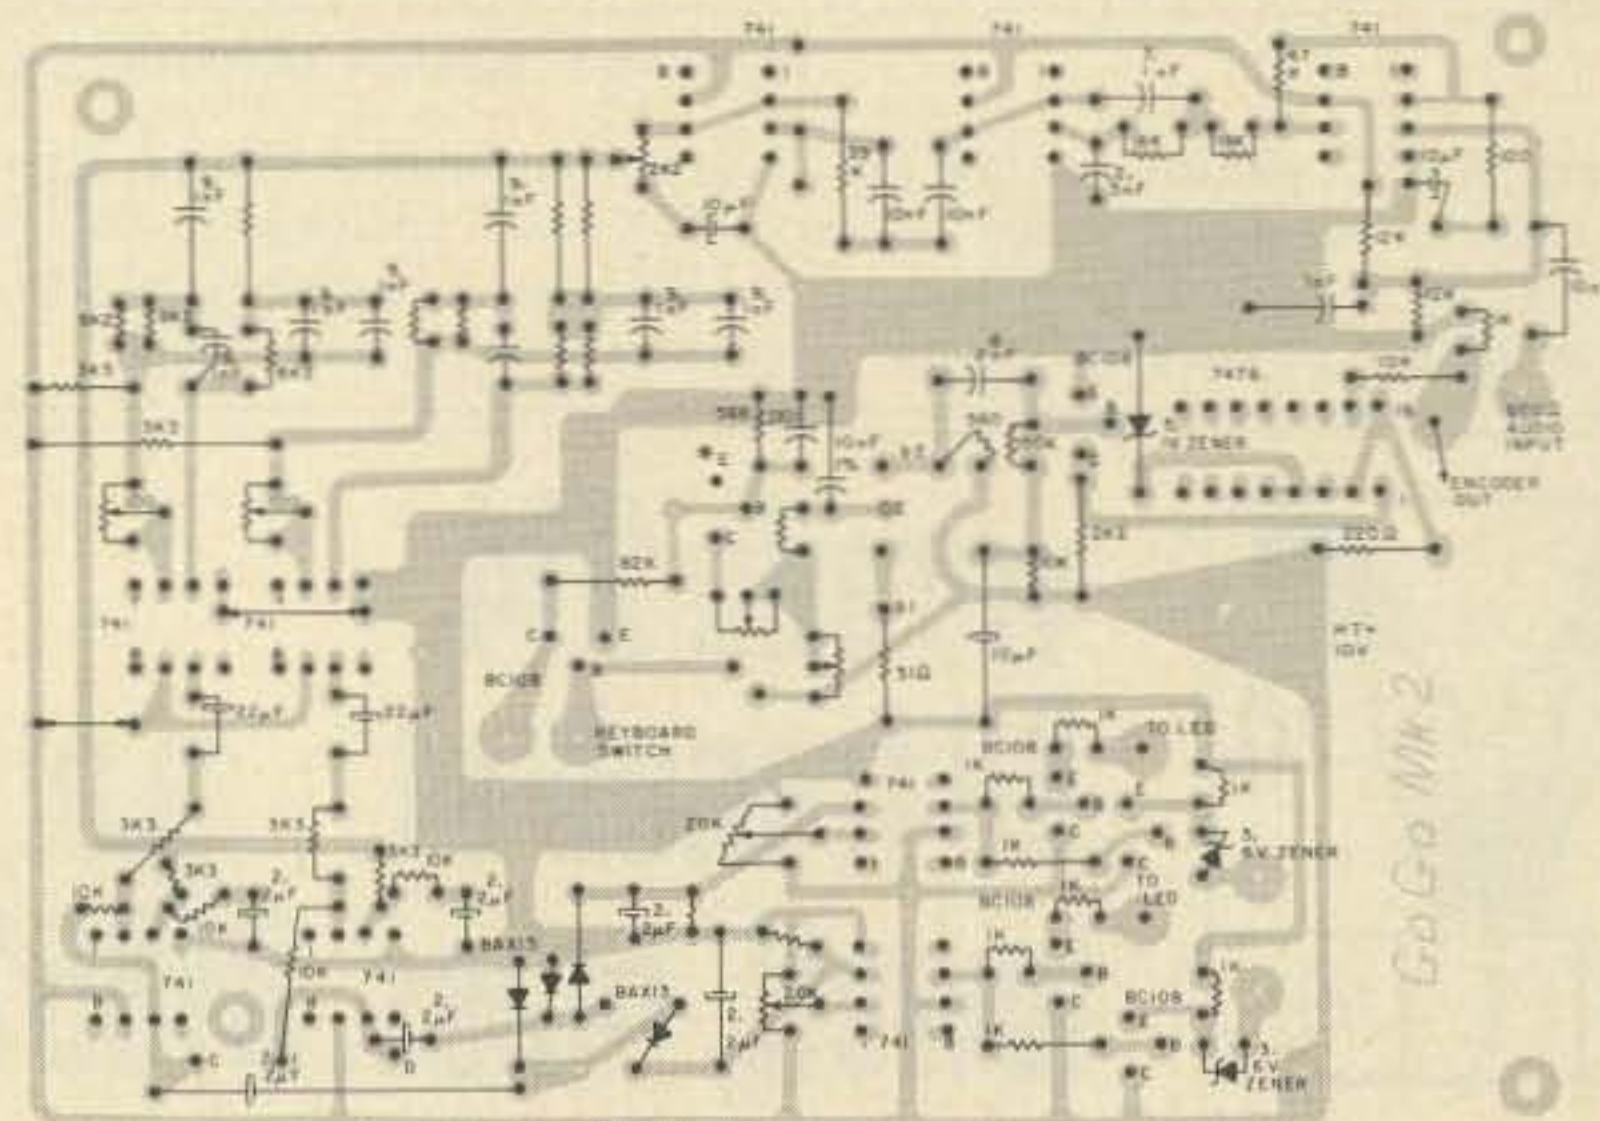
Encoder-decoder PC board and component layout. \*Jumper emitter of TR7 to positive rail.
